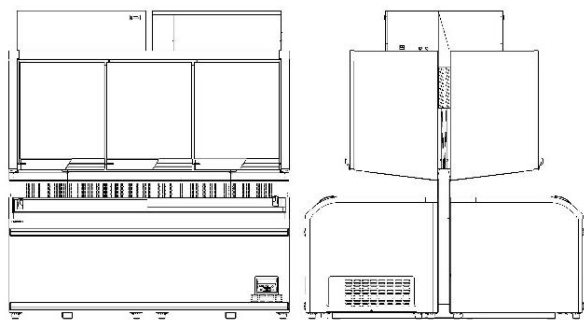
/3: Island installation: KINLEY with dual stand and refrigerator/freezer at bottom (front and side view) – symbols
